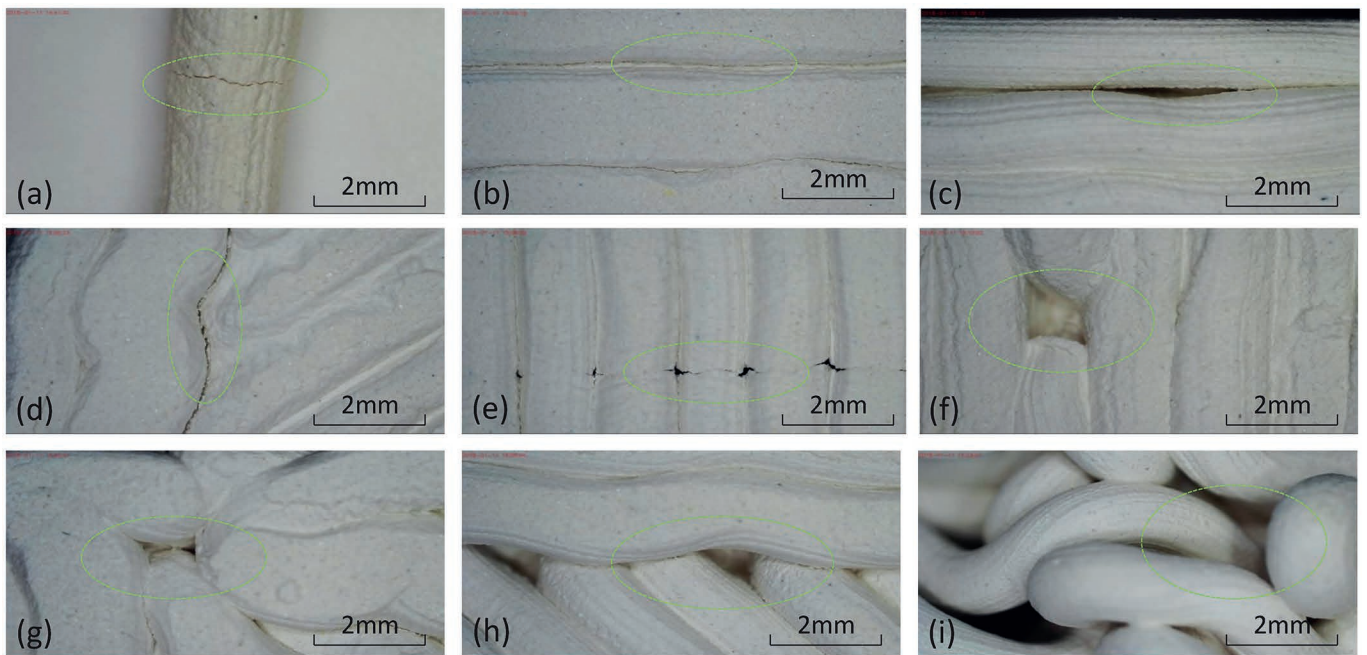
The defect type in the printed parts a) the tiny crack defect in the single clay filament b) d) the small crack defect between adjacent deposited layers c) e) the porosity defects between layers deposited adjacent to each other f) g) the hole defects existing at the junction of many clay filaments h) i) irregular morphological defects of the clay filament.
